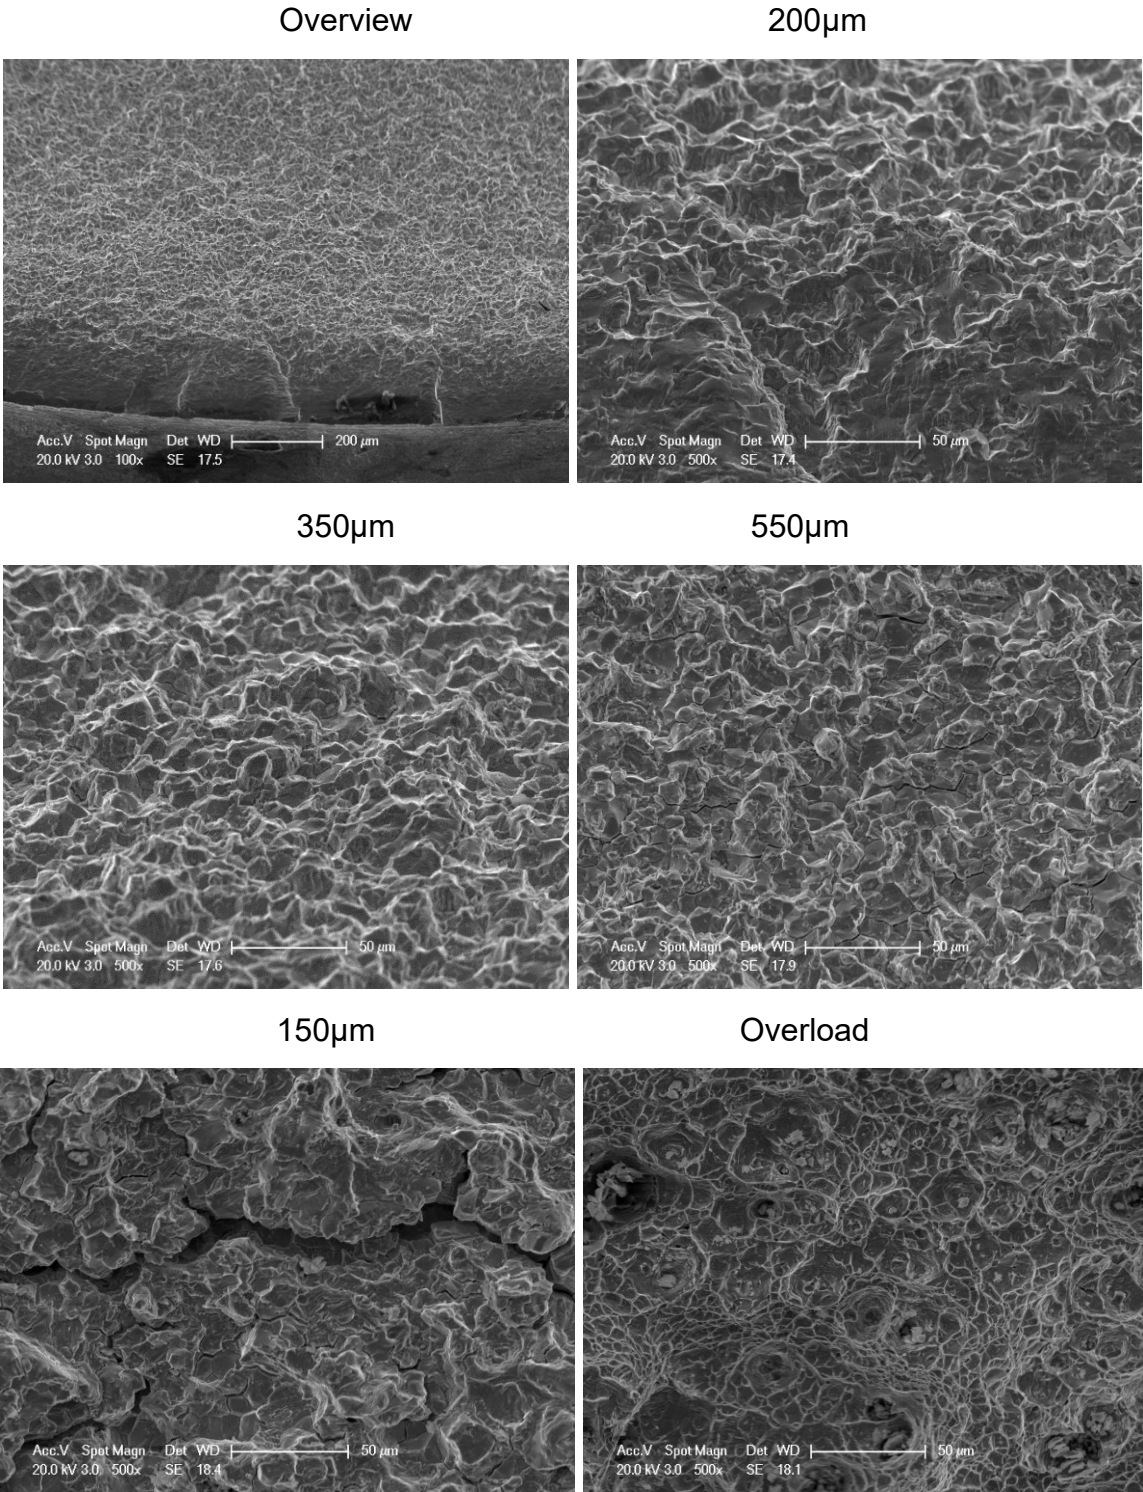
SEM fractographies of the fracture surface of trial sample
